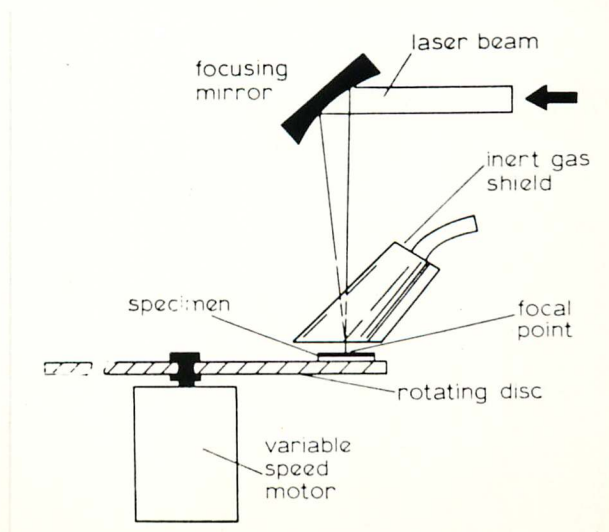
Schematic diagram of the surface melting of specimens using a laser beam.
